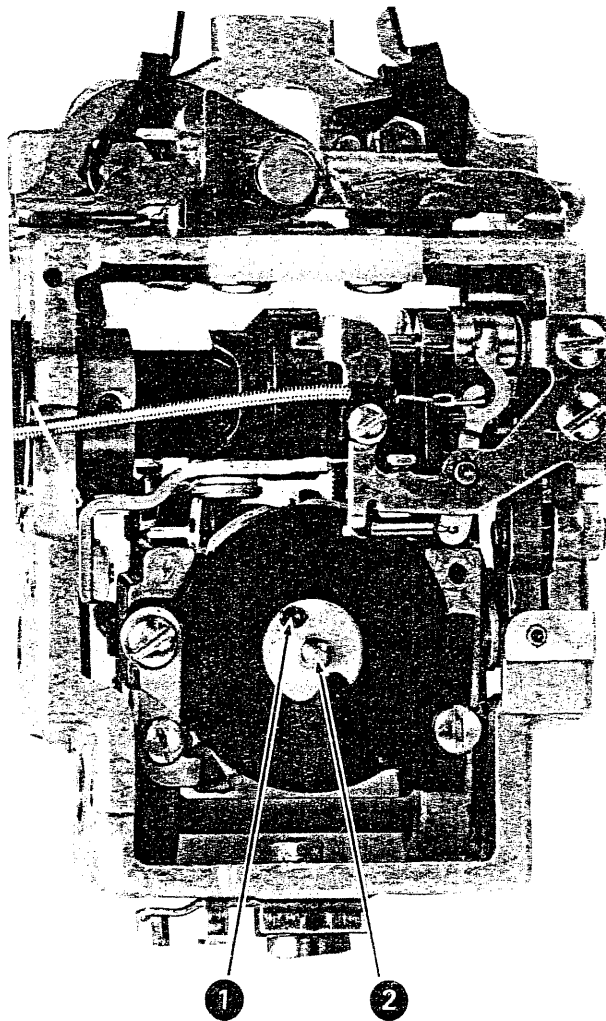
Lower-Ball-Socket and Tilt-Ring Removal (Steps 9 and 10)
